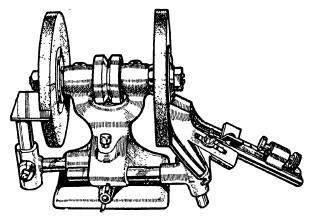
Twist-drill grinder taking drills from 16-in. diameter
